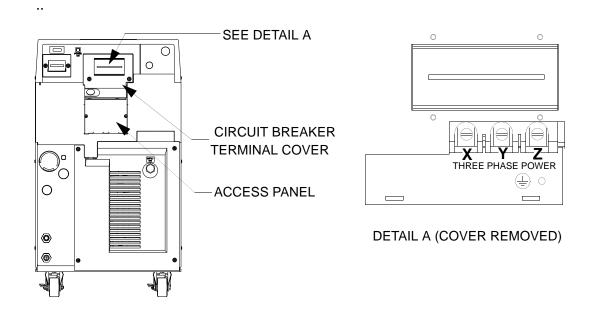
9700A Compressor Circuit Breaker Terminals
